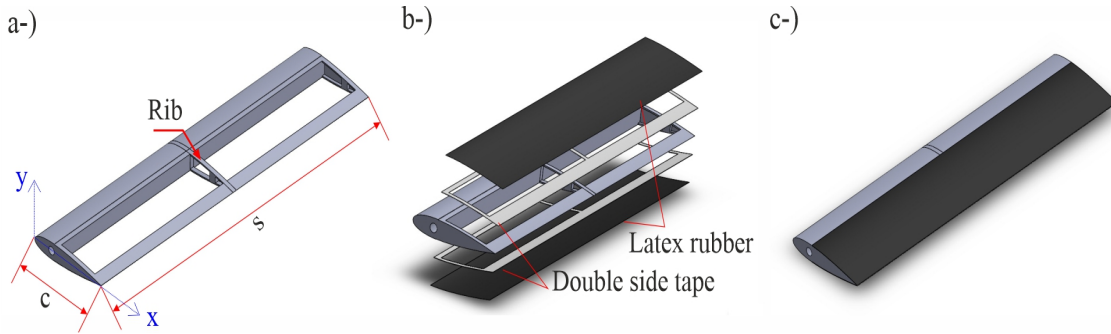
NACA0018 airfoil: (a) without flexible materials (b) fabricating process and (c) final product with partial flexible surfaces
